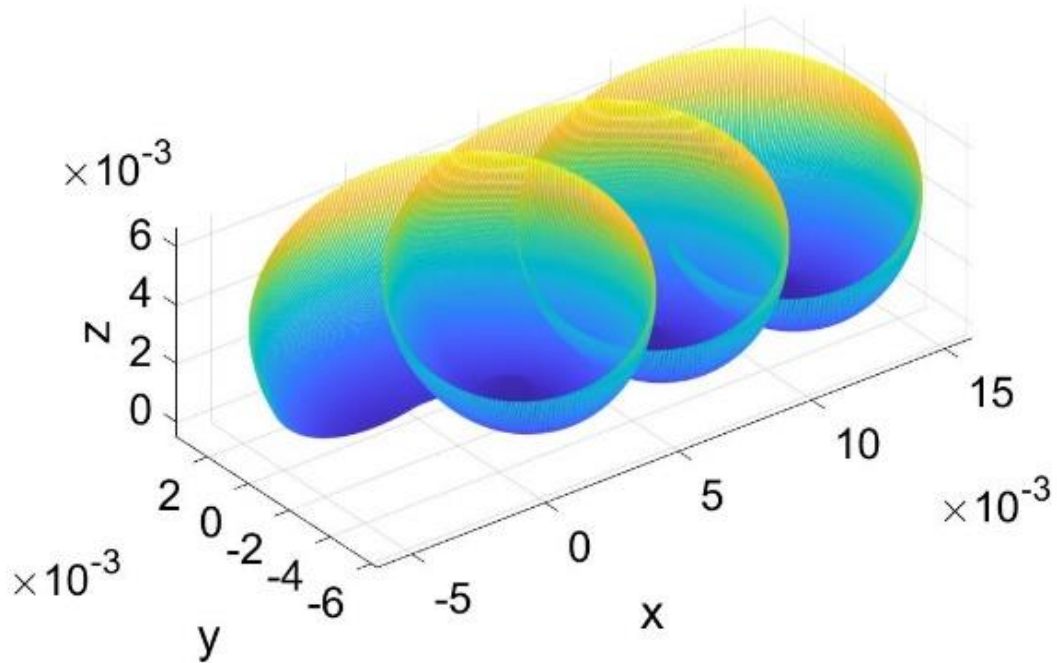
Overall 3D view of a cutting model with one cutting edge, with both lead and tilt angle applied
